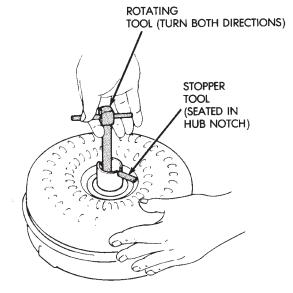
Checking Operation Of Torque Converter Stator One–Way Clutch
